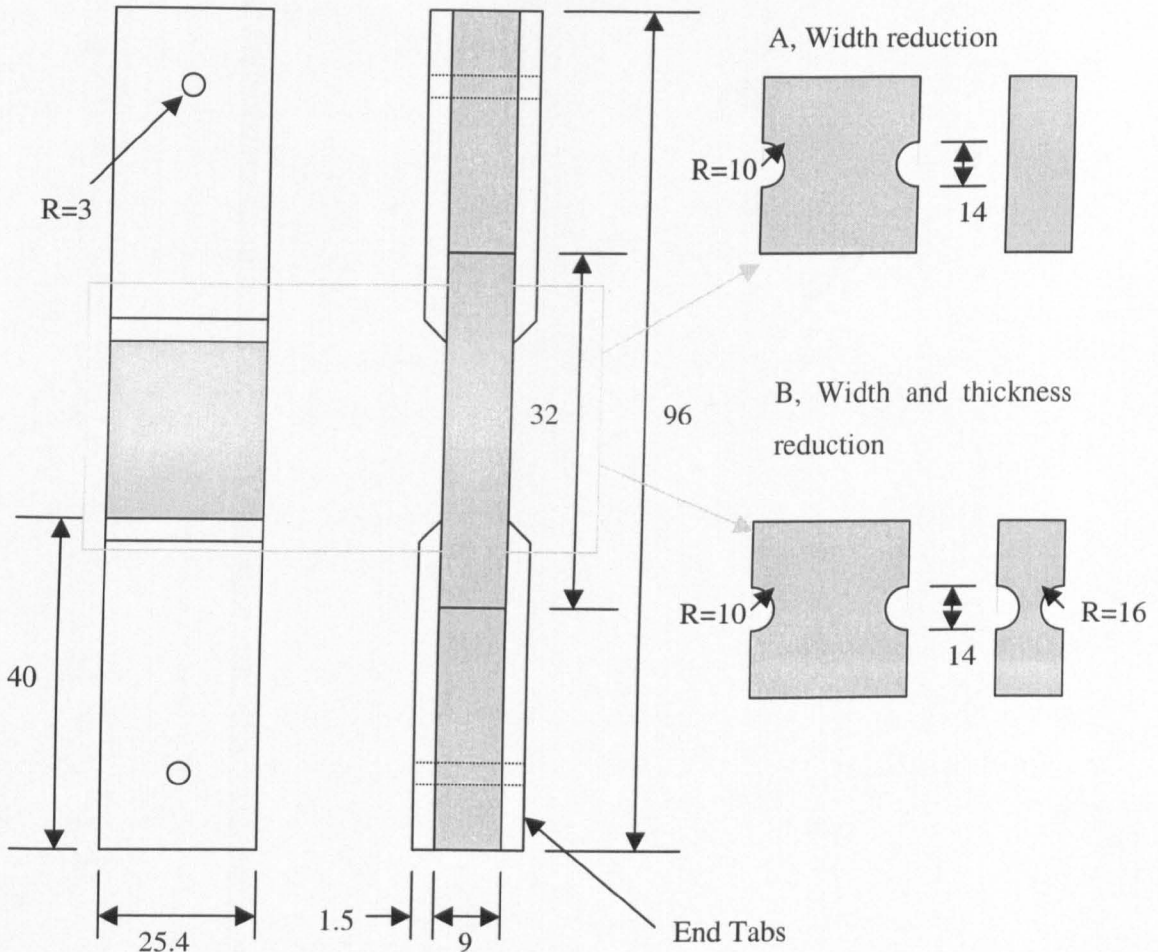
Tabbed hinge block specimens, dimensions in mm.
